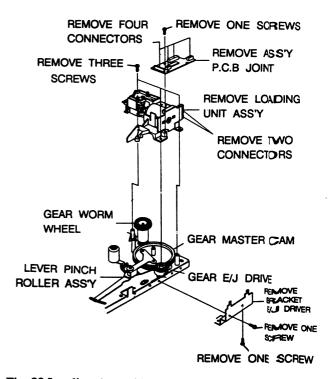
Loading Assembly and E/J Drive Bracket Removal
